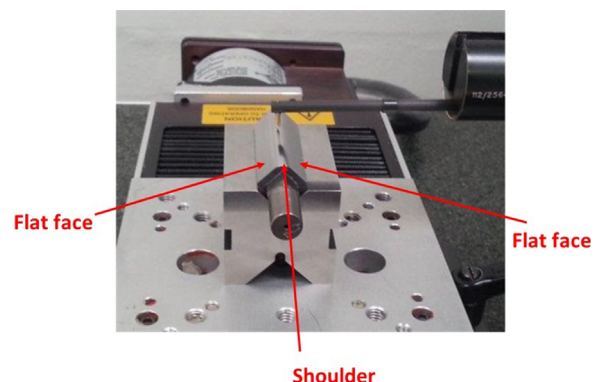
Set-ups for roughness measurements on a BUT tool shoulder. The flat faces at the sides of the shoulder are also indicated.
